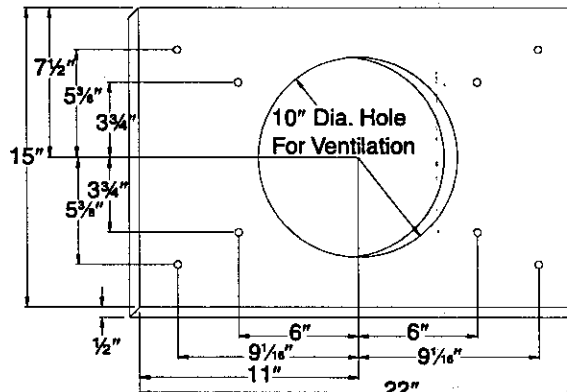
Mount Planer/Molder to Optional Multi-Purpose Stand Model No. 22250
